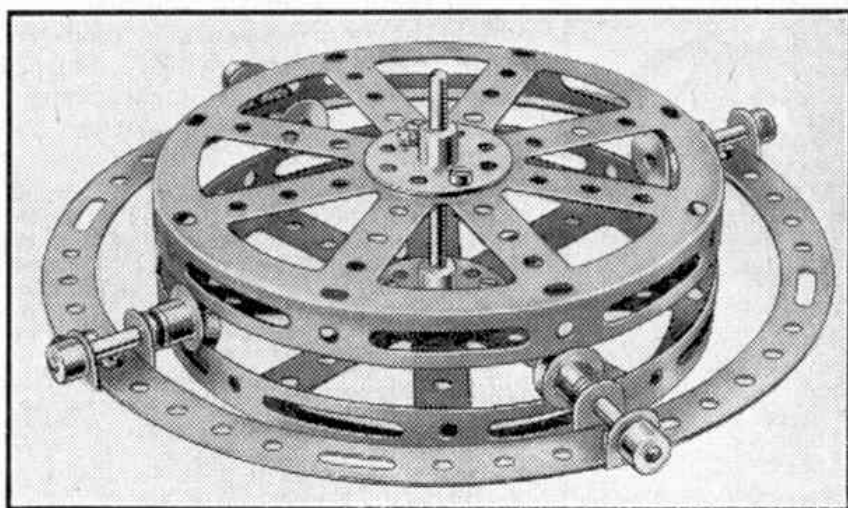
Hub Discs and a Circular Strip form the main parts of this useful roller bearing.
